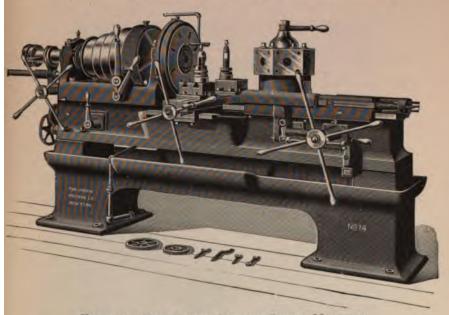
THE SINGLE TURRET SCREW MACHINE.
